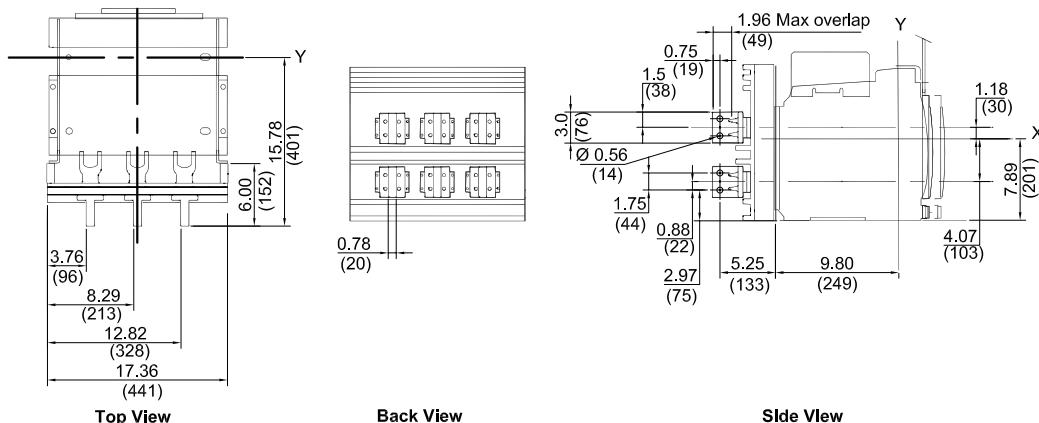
800–3000 A and 4000 A (H1, H2, H3) Master Drawing
